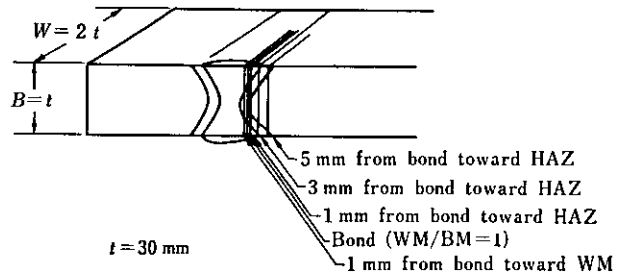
Notch position of a COD specimen in the welded joint
